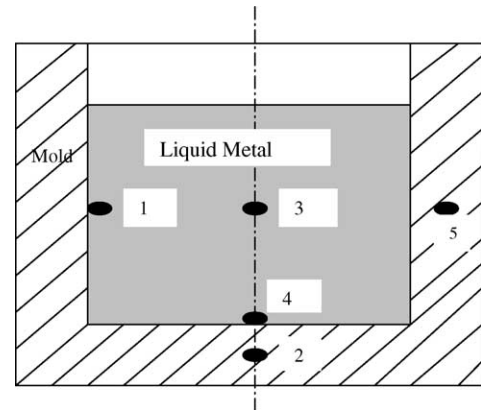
Longitudinal section of the mold with the positions of thermocouples.
